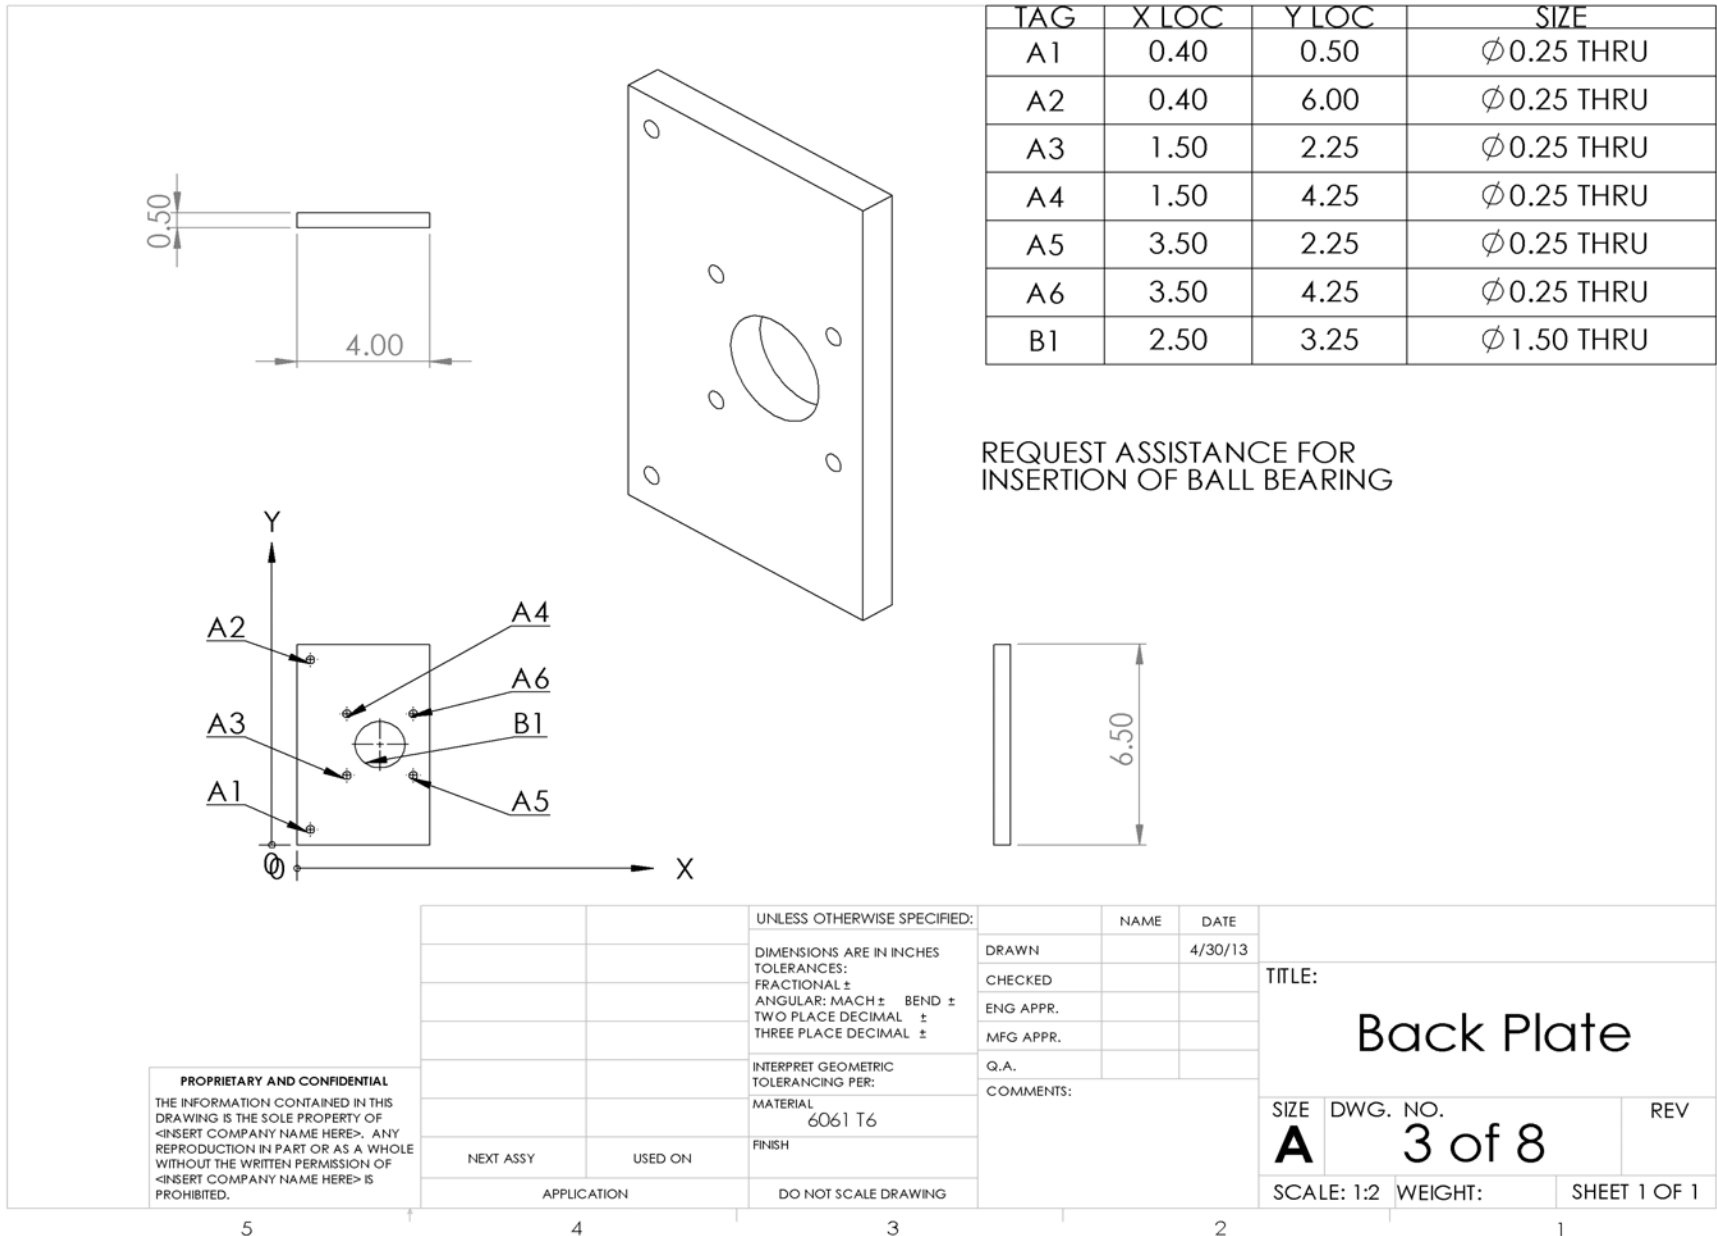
Back Plate*. This part will connect to the faceplate that will be provided to us through holes A3 through A6. Then with A1 and A2, this plate will connect to the Back Arch, which will hopefully be enough to keep everything stable and connected to the face plate. A ball bearing will fit in hole B1 and this will house the main shaft which will turn the rollers and be connected directly to the given gears.
